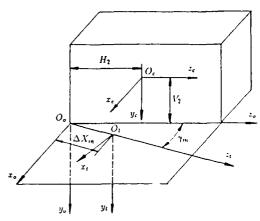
Machine-tool Settings for Formate Face-milled Gear.
